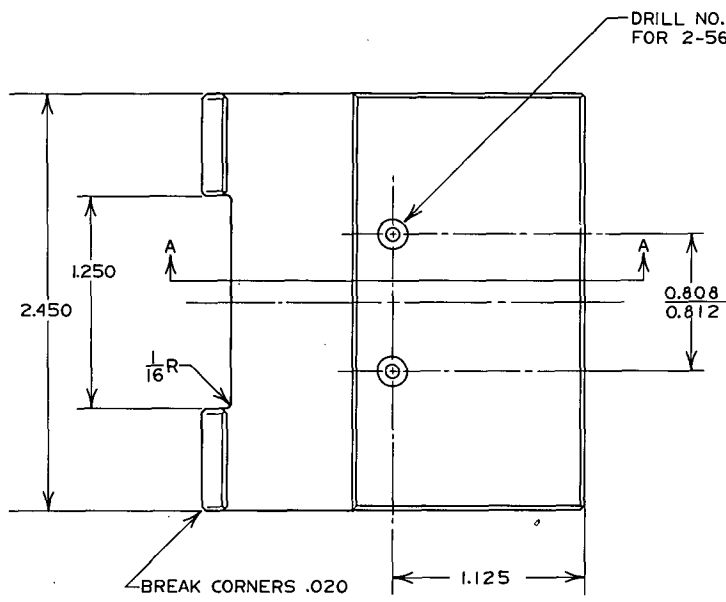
, 300.1-16, 300.1-17, and 300.1-18 are various views of assembled faceplate box components. These drawings indicate maximum and minimum finished dimensions as well as assembly techniques to be applied in manufacture.
